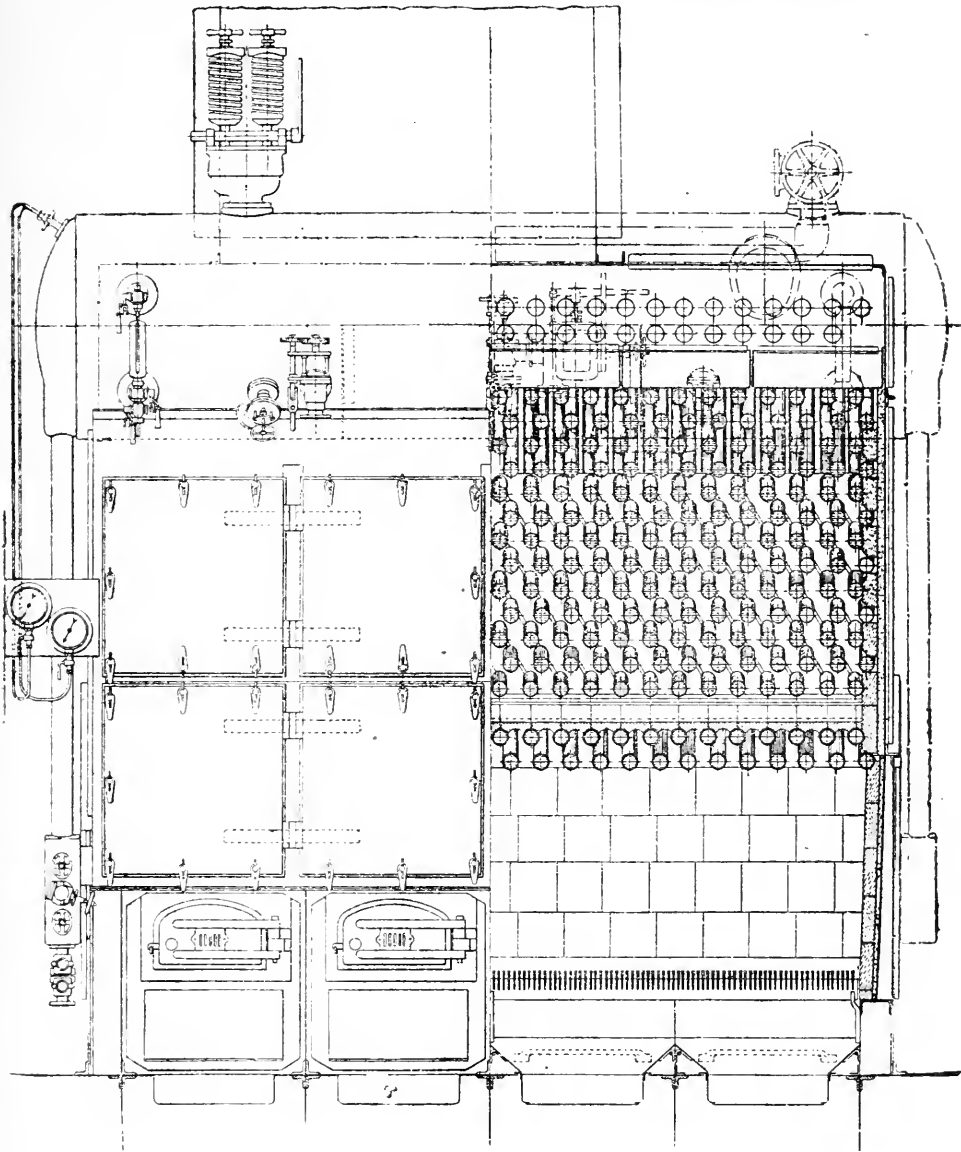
Babcock & Wilcox Boiler (Small Tube), Naval Design.
